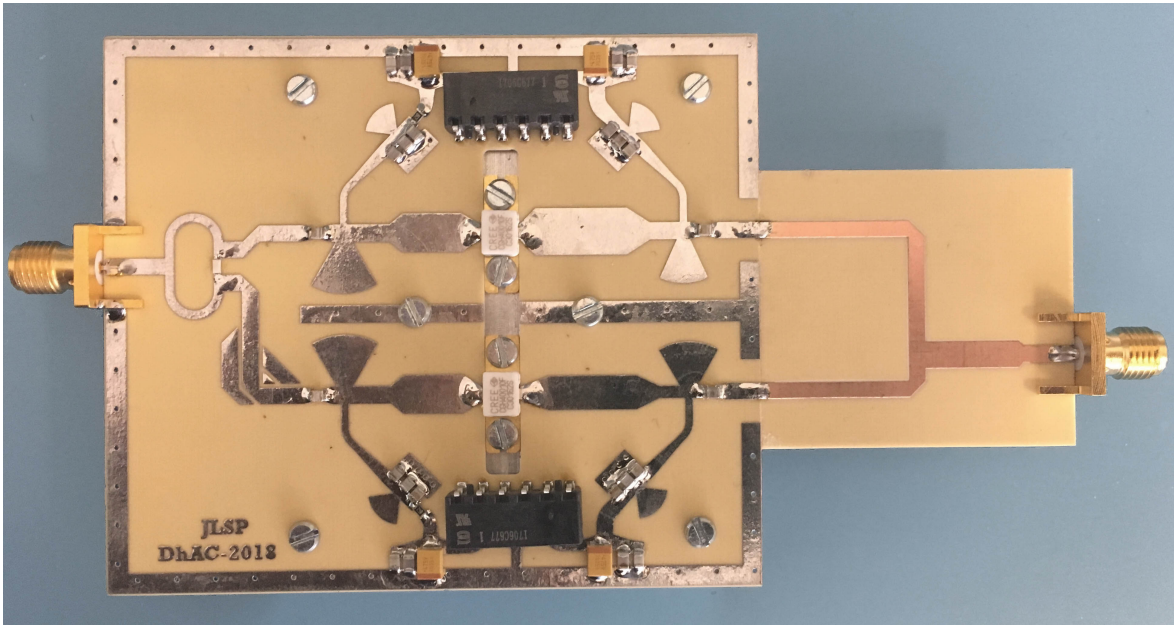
Fabricated DhPA with traditional output power combiner board.
